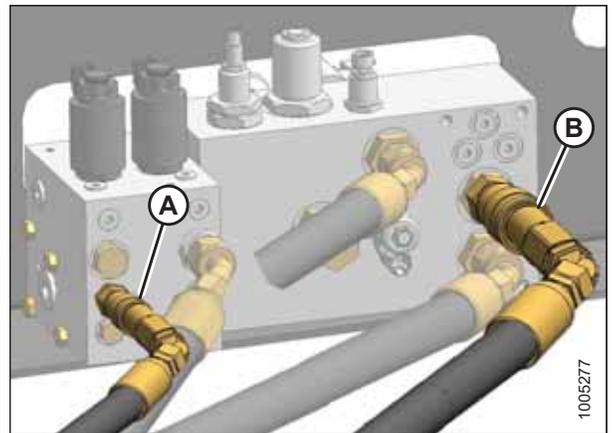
Auger Pressure and Auger/Reel Return Hose Couplers – 4.9 m (16 ft.) Header Shown, 5.5 m (18 ft.) Header Similar
